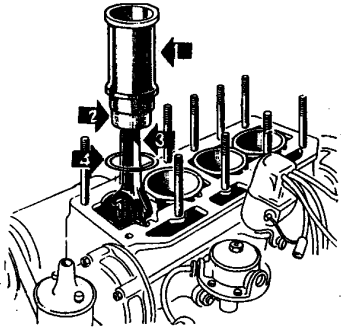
Wet-type sleeve used by renault: 1-sleeve, 2-piston, 3- connectingrod, 4- copper sealing ring.
